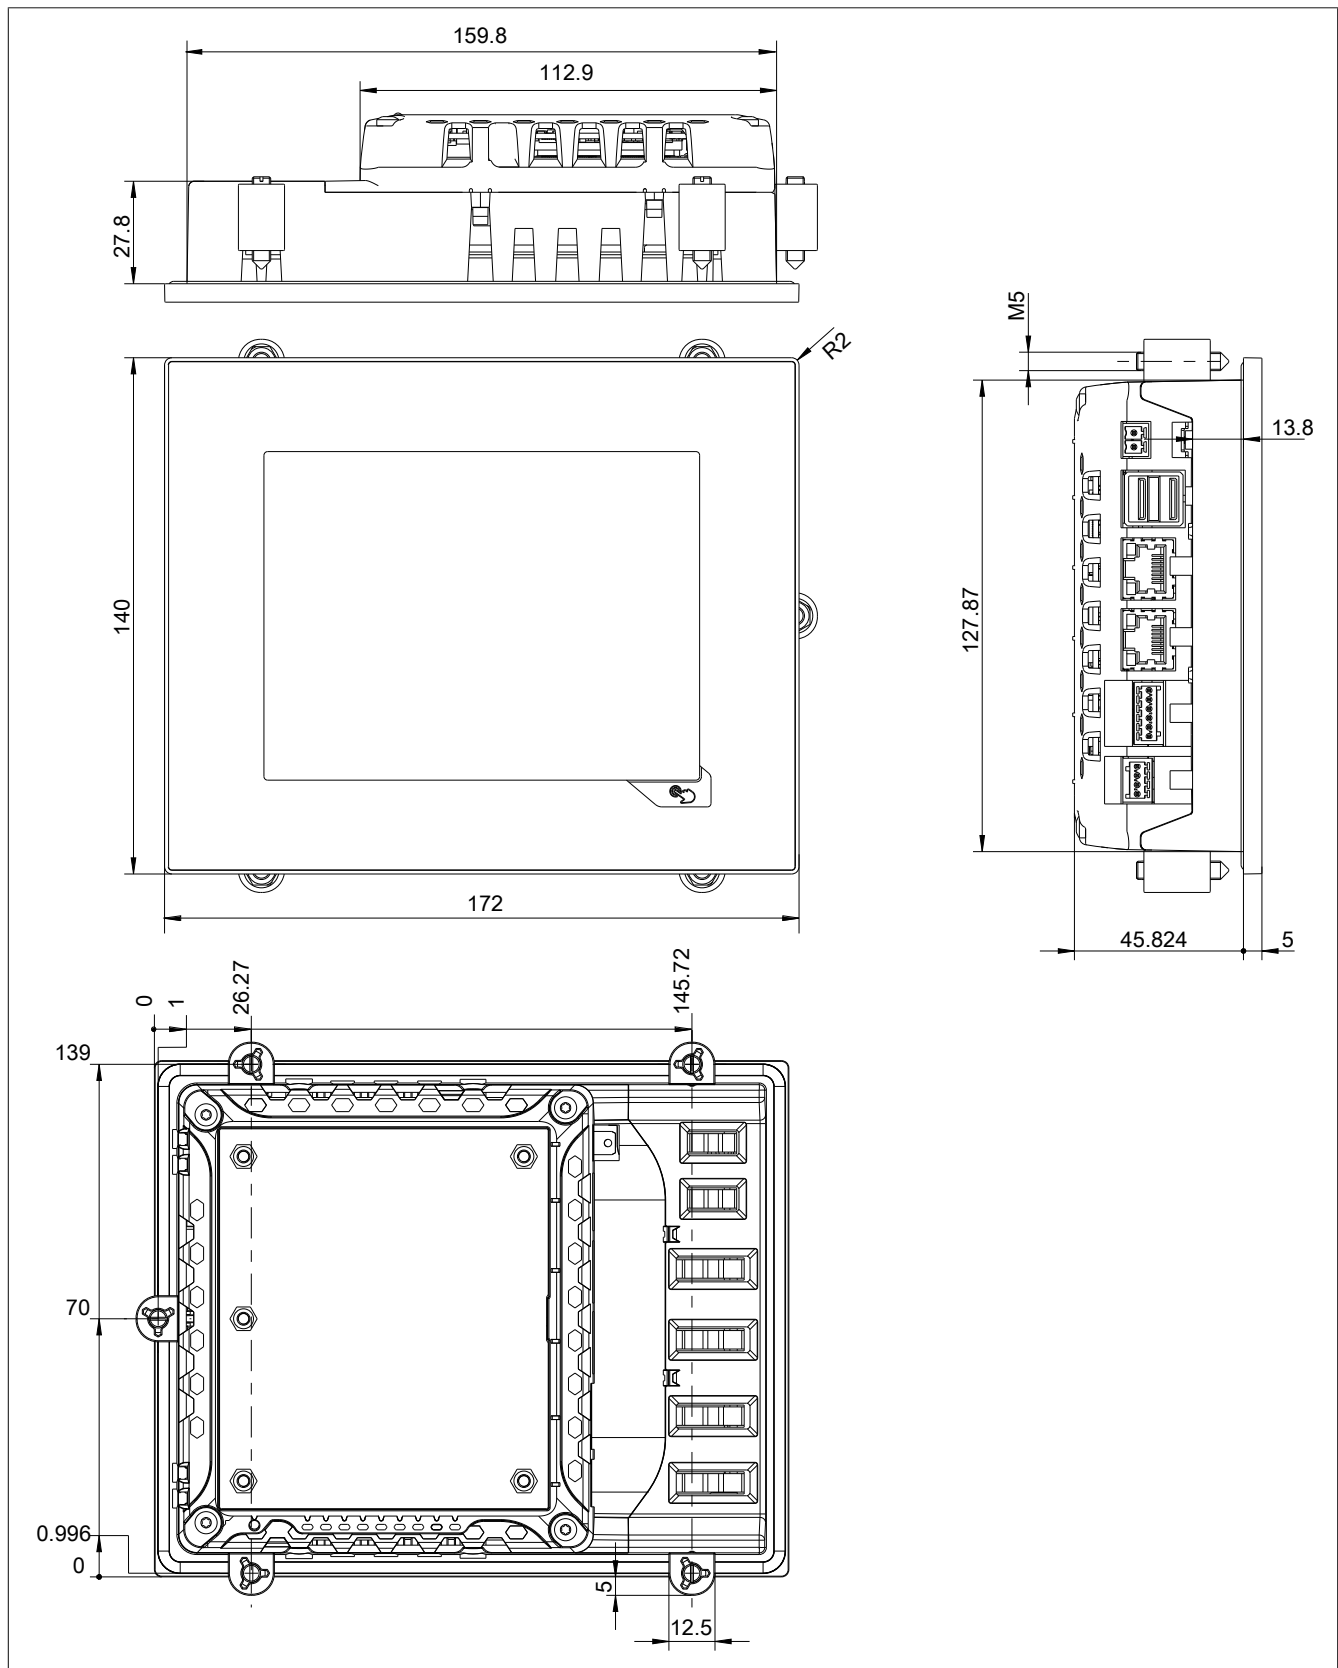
Dimensions - 4PPC70.057x-2xx - 4PPC70.0573
